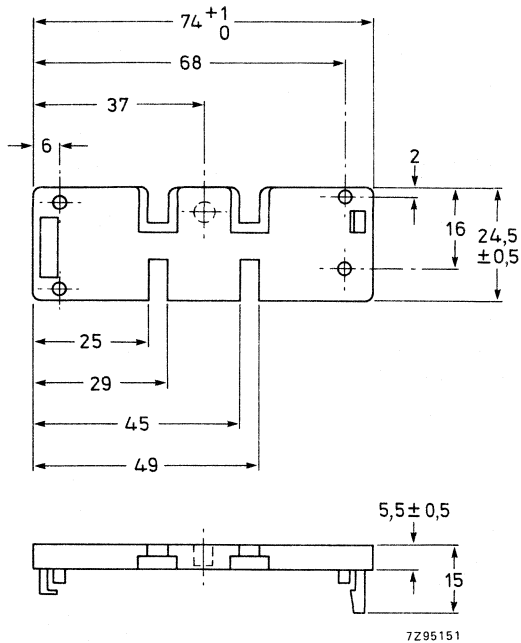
Device mounted on a printed circuit board (see Fig. 2).
